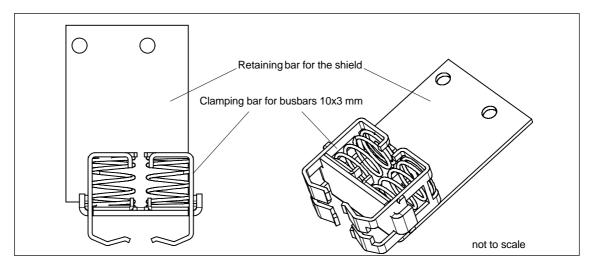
Shield connection 6SN1162–0FA00–0AA1
